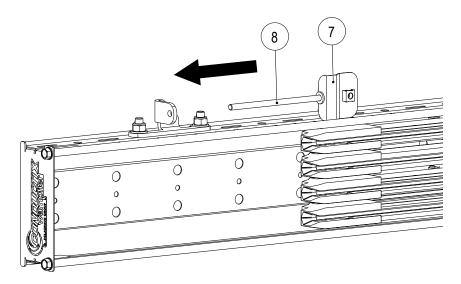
Slide threaded rod (8) with fastening plate of clamping unit (7) onto holder
